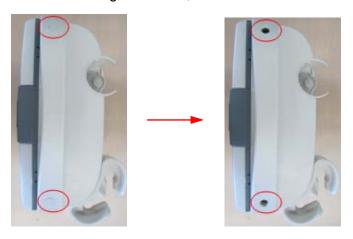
Disassembly of Rear Cover Assembly of Main Unit (1)
